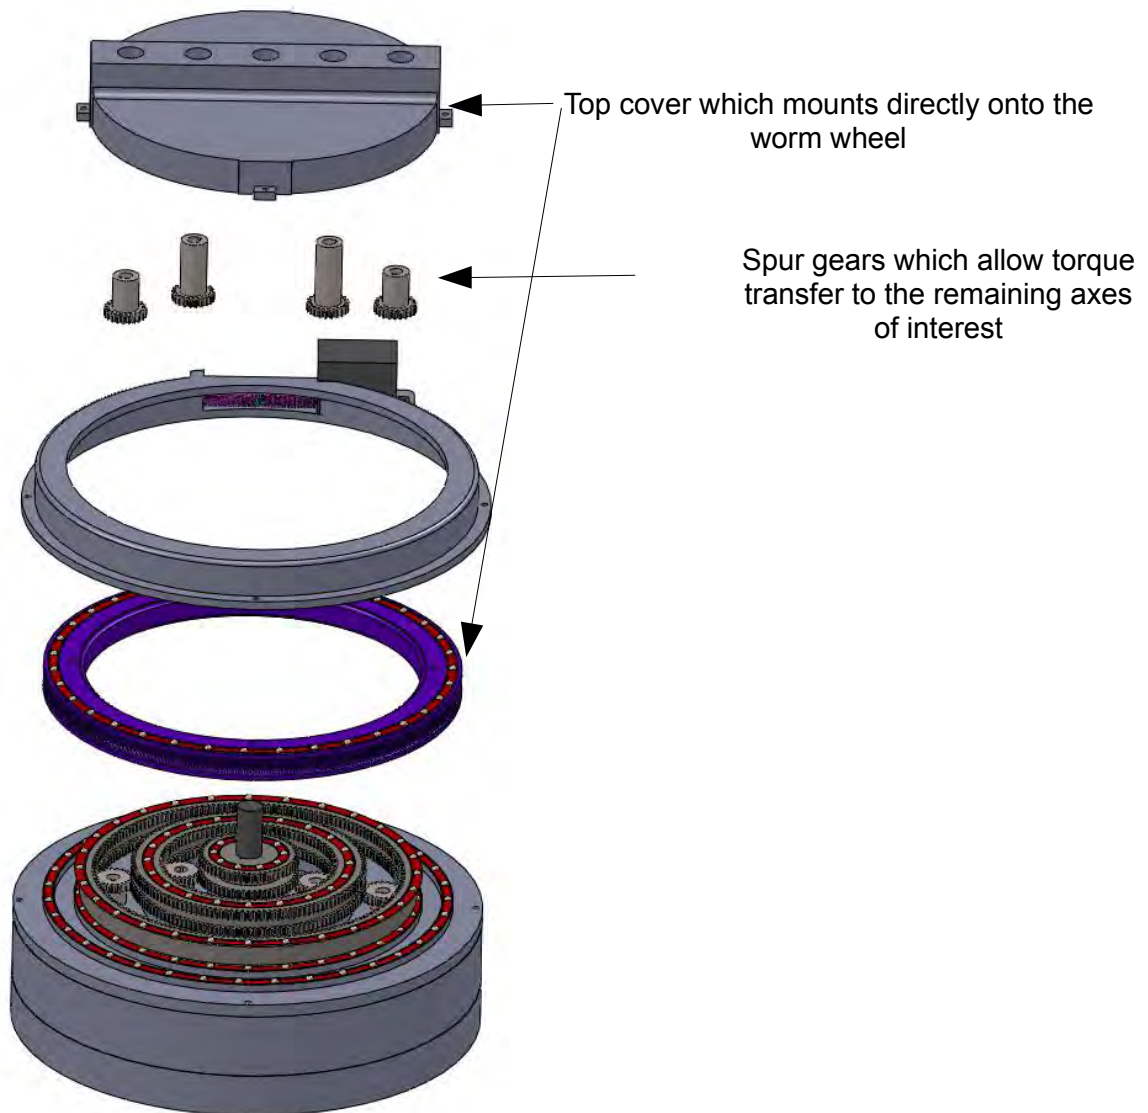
Exploded view of concentric drive showing top cover and worm wheel
